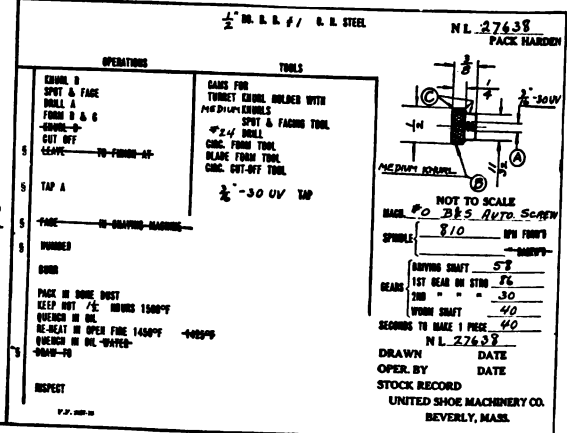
SHEET FOR ½-IN. KNURLED NUT
